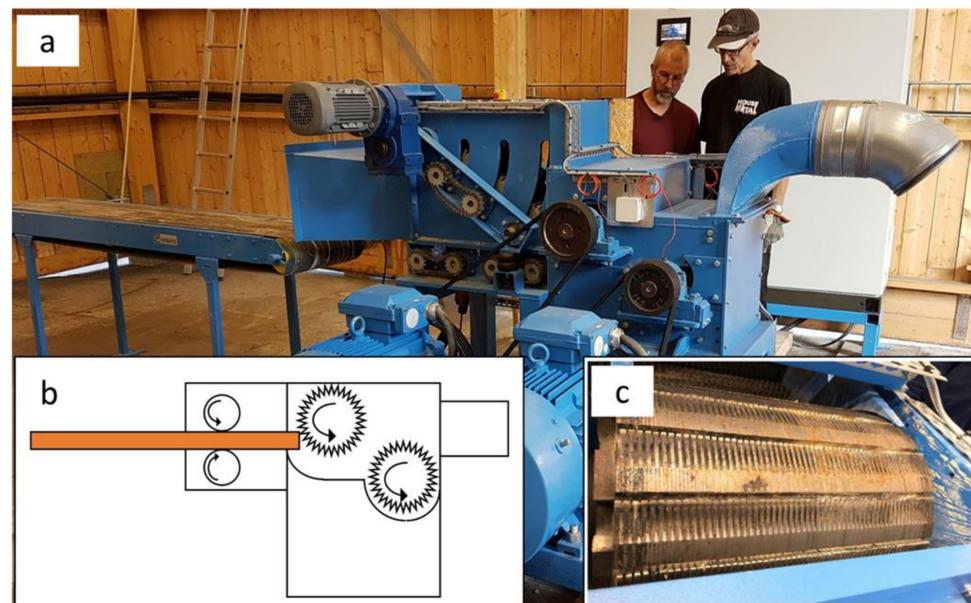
(a) The prototype multi-blade shaft mill (MBSM) without its housing enclosure, (b) the principle of operation and (c) the multi-blade shaft [3].
